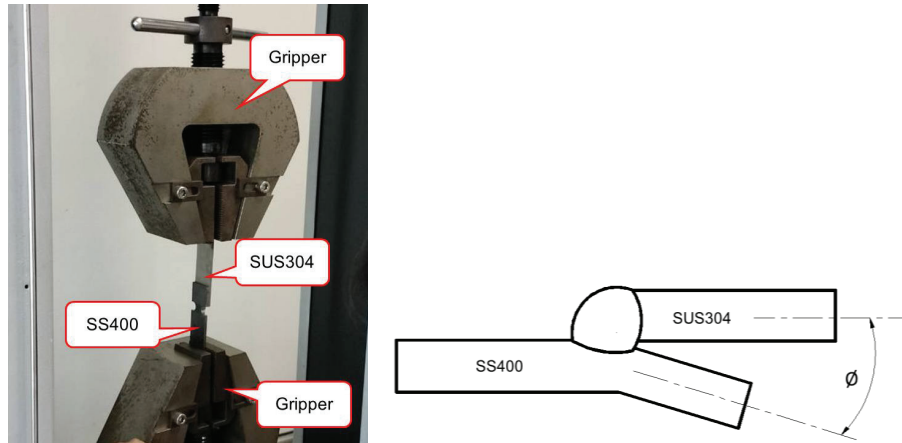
(a) tensile-shear strength test on universal testing machine (b) Bent angle measurement.
